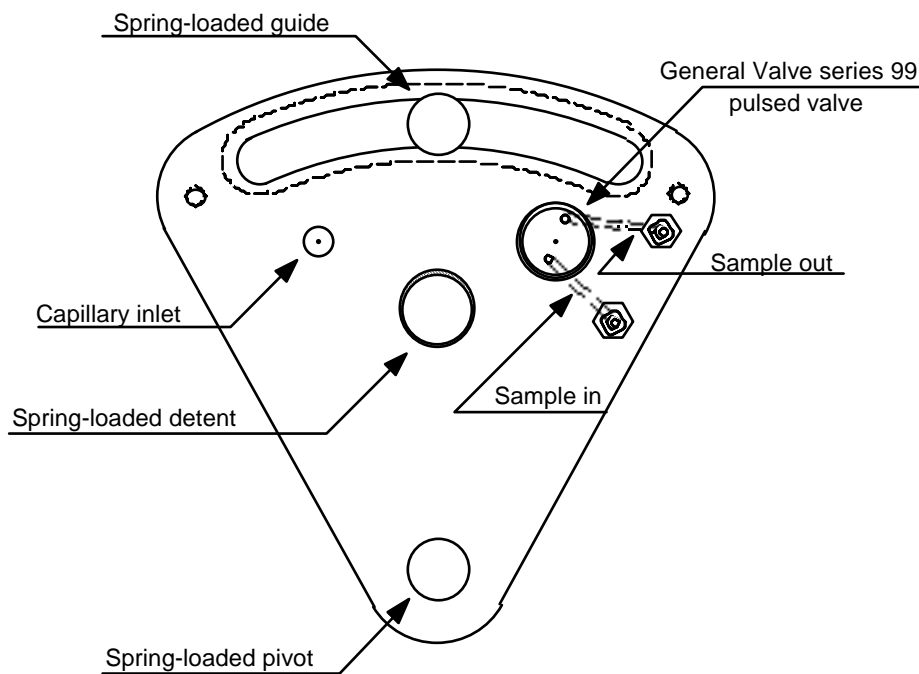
Top View of the Movable Inlet Mounting Plate.
